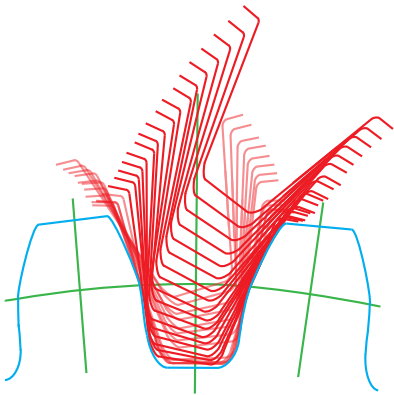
Hobbing is a generating process. The relative motions of the cutting tool and workpiece allow a tool with straight-sided cutting edges—the hob—to generate an involute curve.
